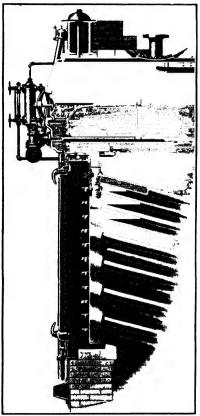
Section through front end of Babcock and Wilcox boiler.
